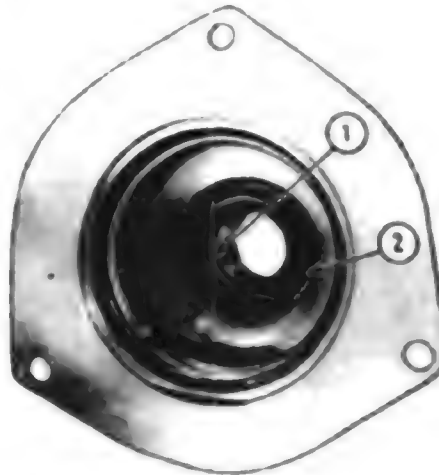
Install TA input (clutch) shaft oil seal (1) with lip towards rear and pto input shaft seal (2) with lip towards front of TA housing.
